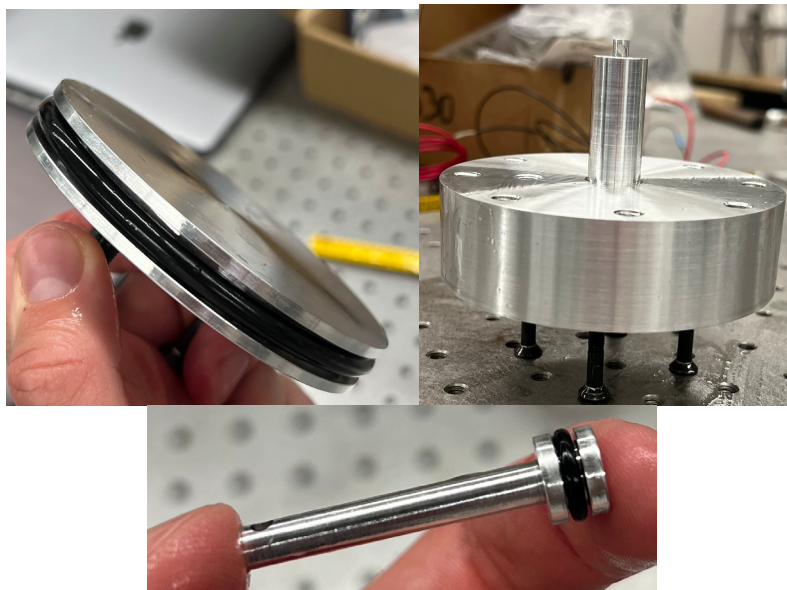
Components of second piezohydraulic actuator prototype. (Top) from left: wide piston, casing, and narrow piston (bottom).
